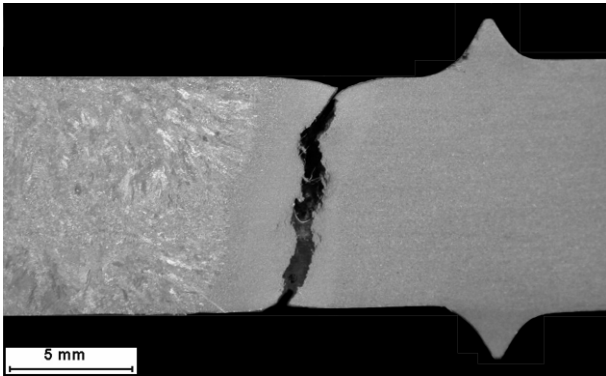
Cross-weld sample prepared from E911 pipe welded with matching filler and creep tested at 600°C for 18000 hours. The macroscopic low deformation fracture is located in the FGHAZ close to the unaffected base material [12].
